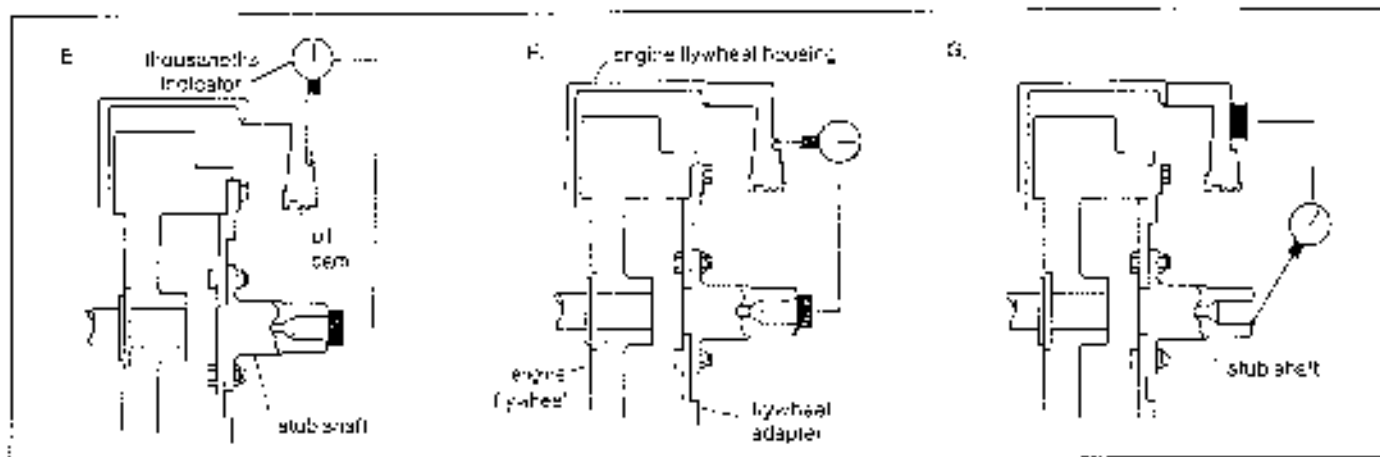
Dial Indicating Oil Dam and Stub Shaft.
